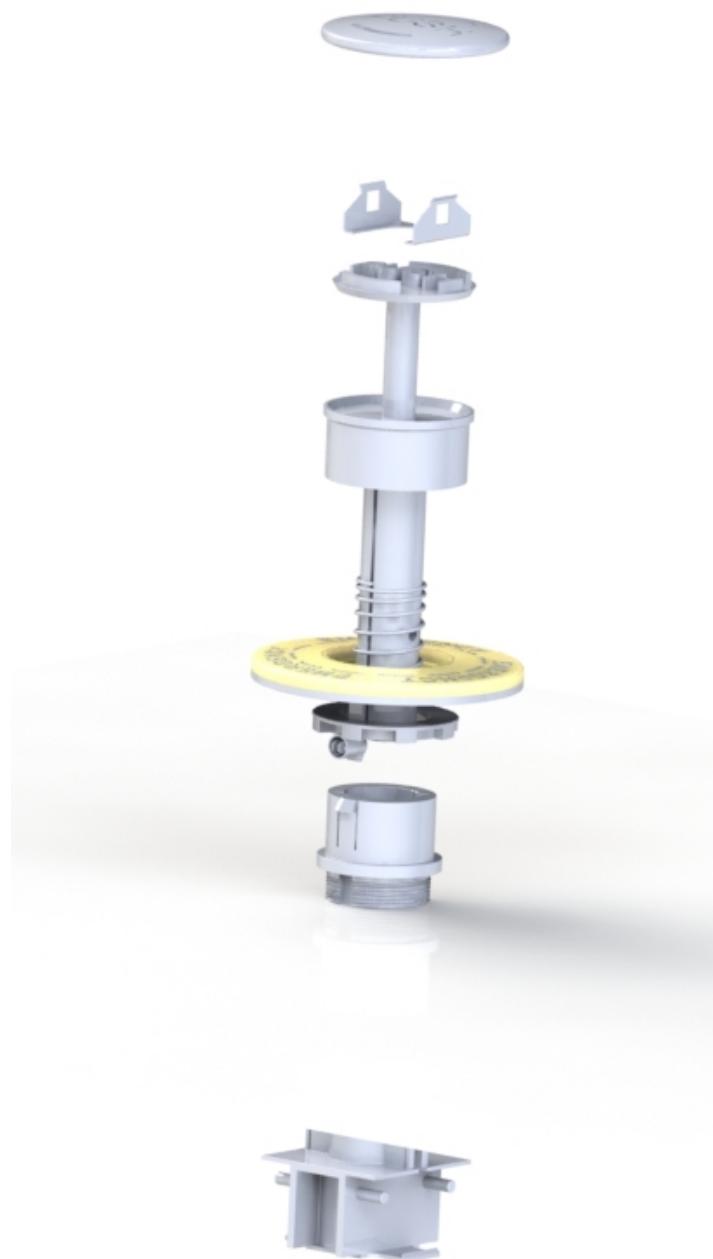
Kumar, Vishakh: Exploded View of Emergency Button
